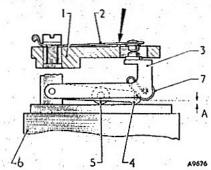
The contact gap setting on earlier-type rocker assemblies
